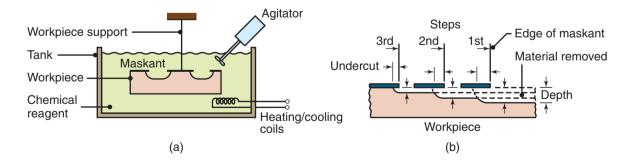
(a) Schematic illustration of the chemical-machining process; note that no forces or machine tools are involved in this process. (b) Stages in producing a profiled cavity by chemical machining; note the undercut.
